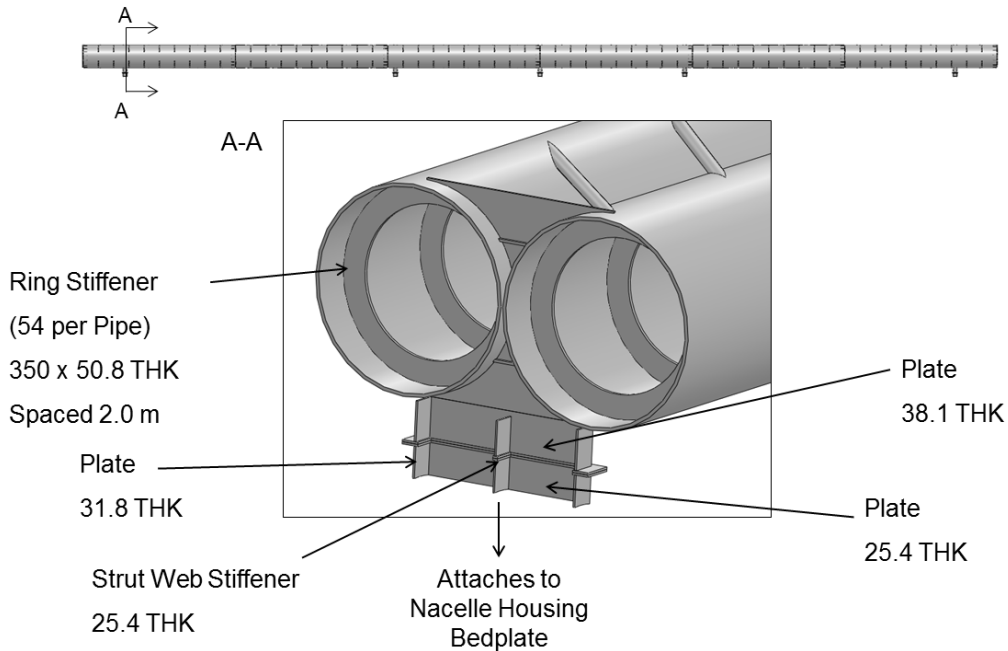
RM4 device wing inner stiffener detail (units in mm).
